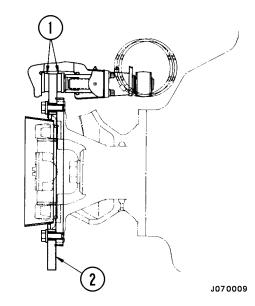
PARKING BRAKE ADJUSTMENT
